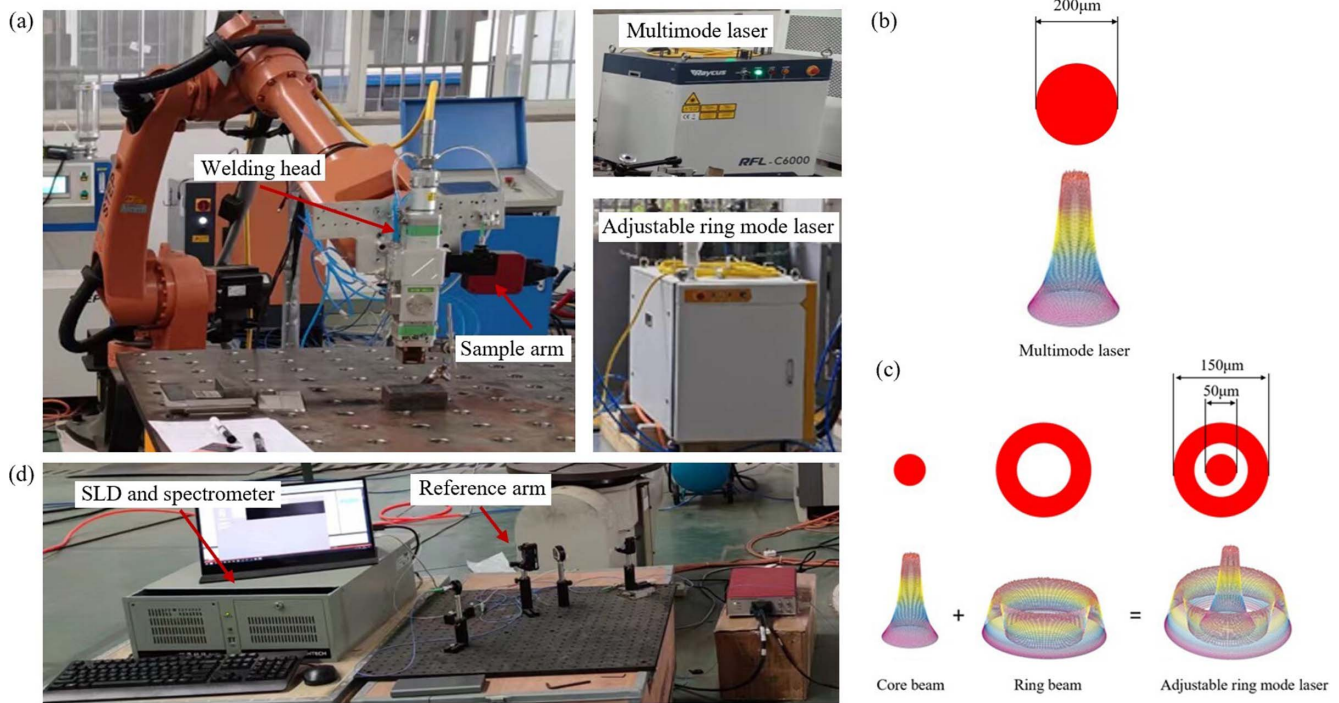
(a) Laser welding system; (b) beam profiles of the multimode laser; (c) beam profiles of the ARM laser; (d) SD-OCT system.
